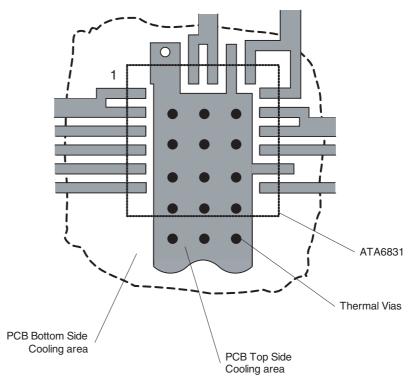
Recommended Cooling Area Extension and PCB Pin Layout
